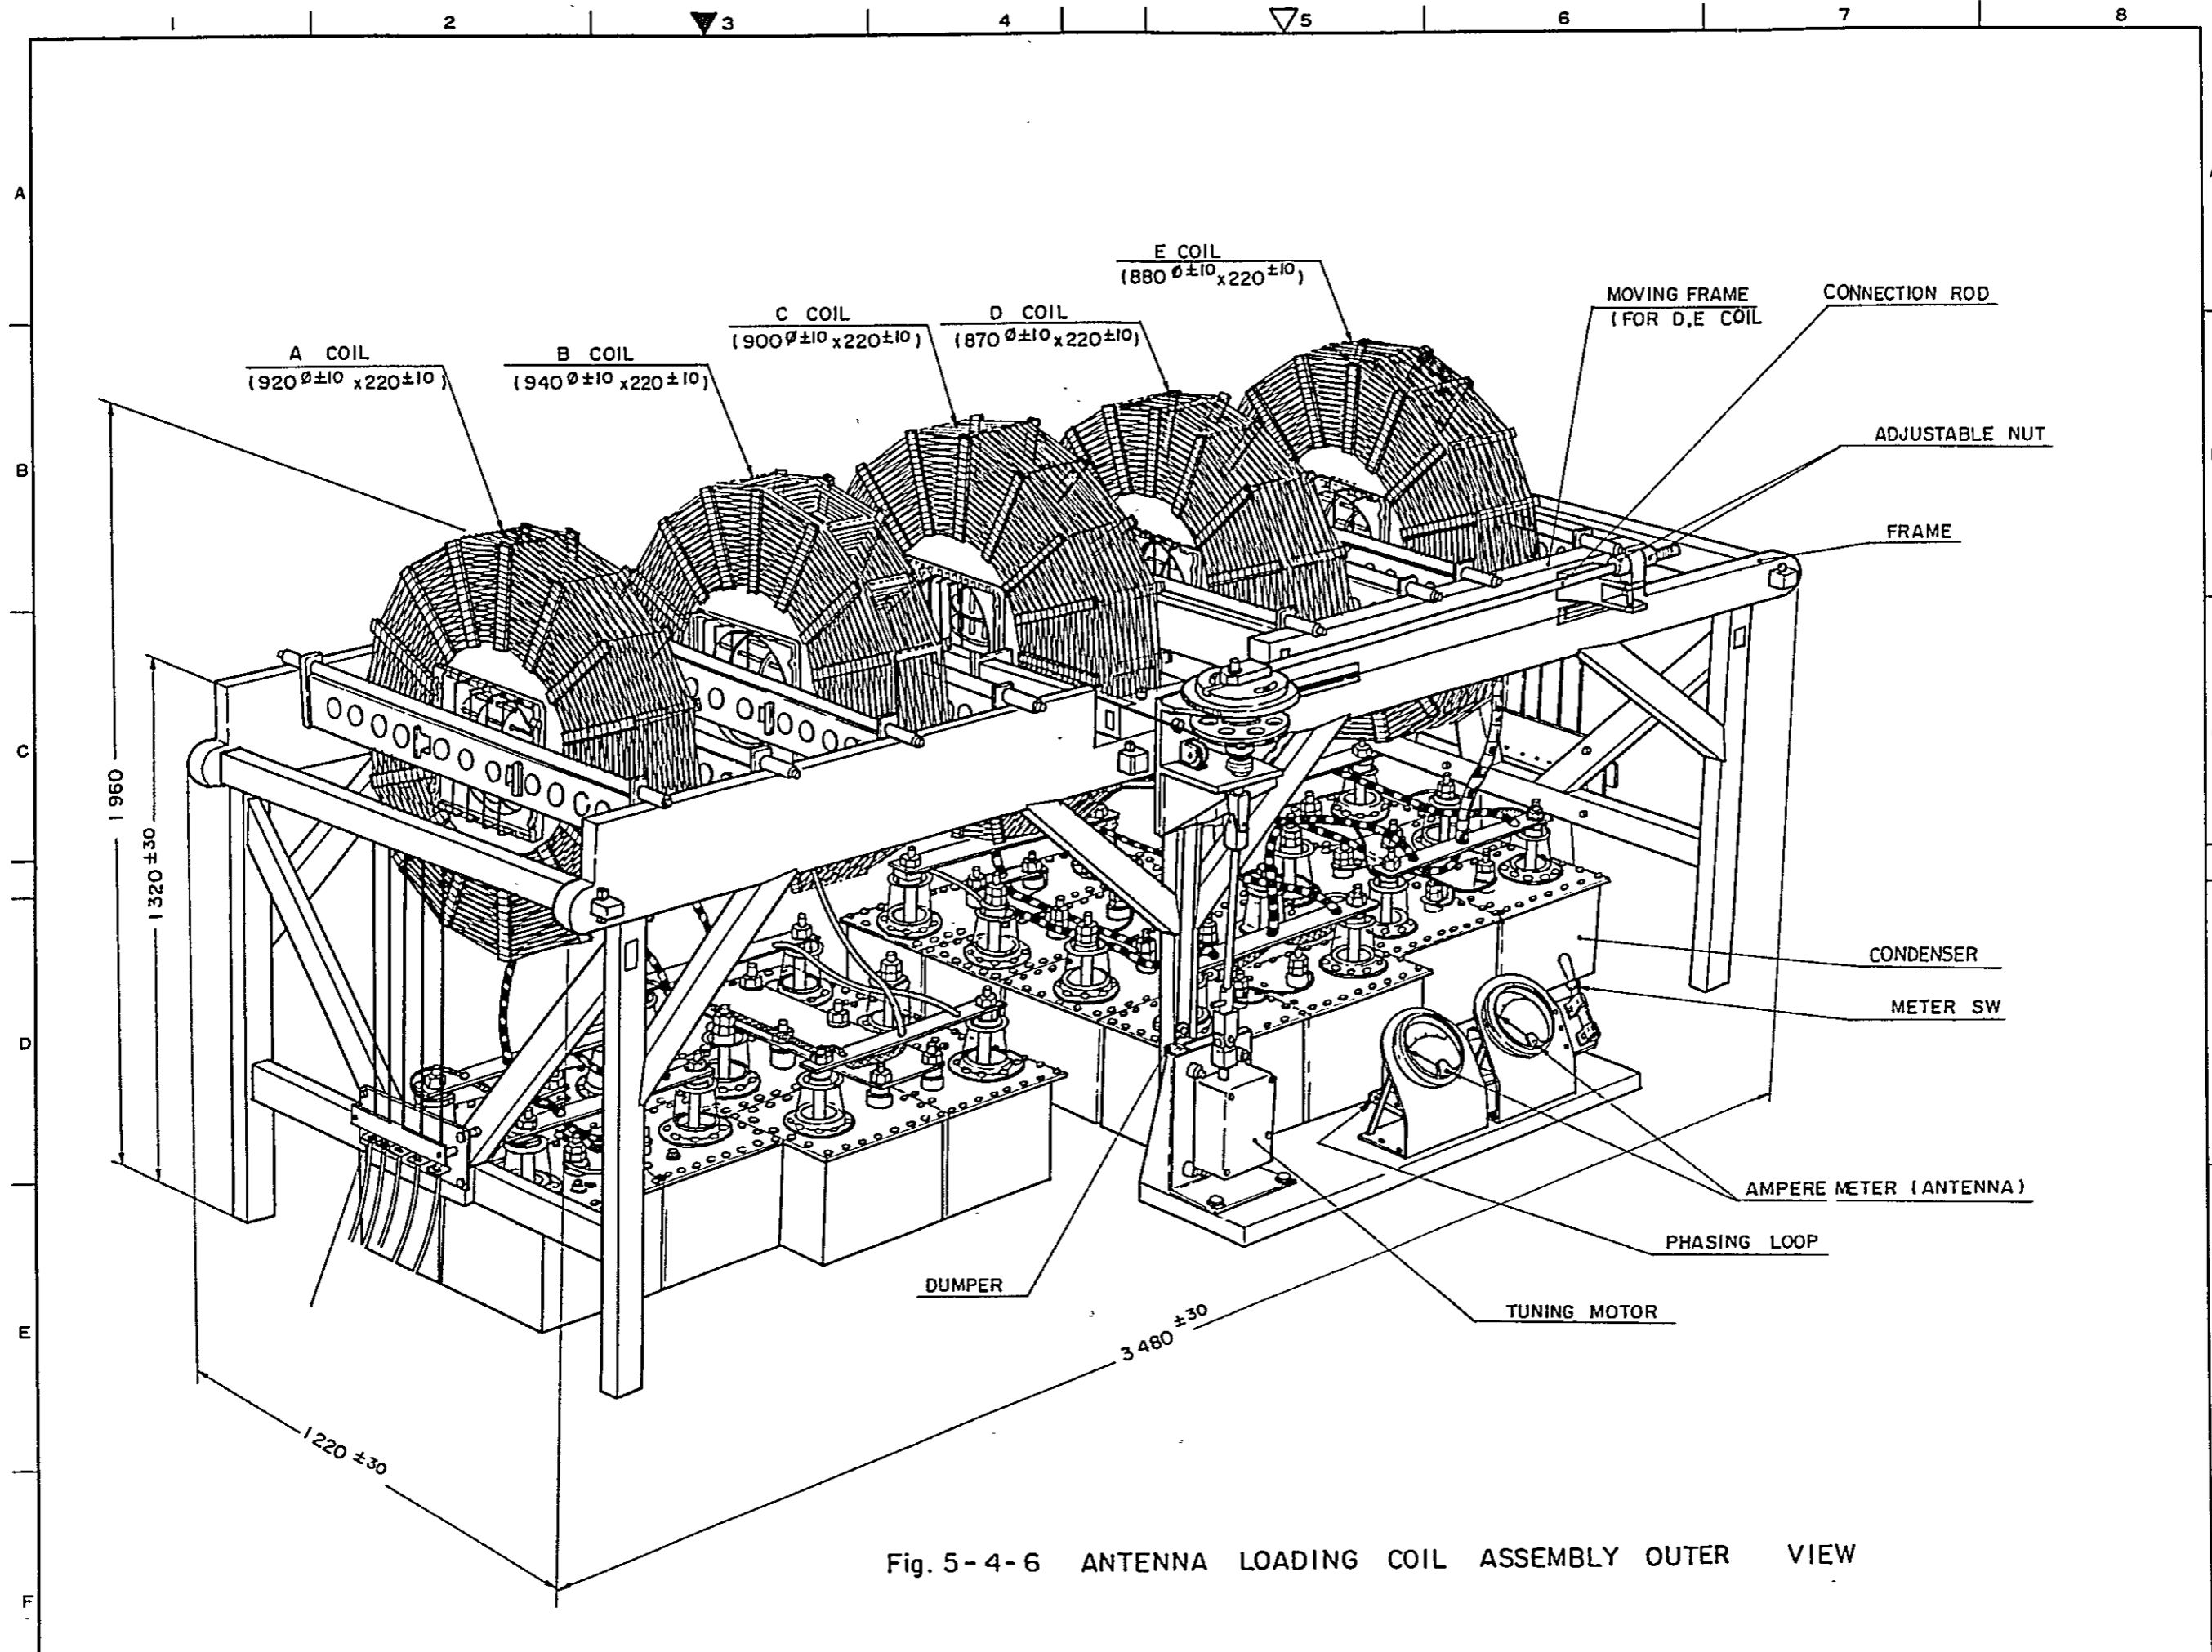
ANTENNA LOADING COIL ASSEMBLY OUTER VIEW
